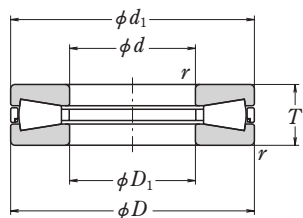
Thrust Tapered Roller Bearings in a Heavy-Duty Extruder
